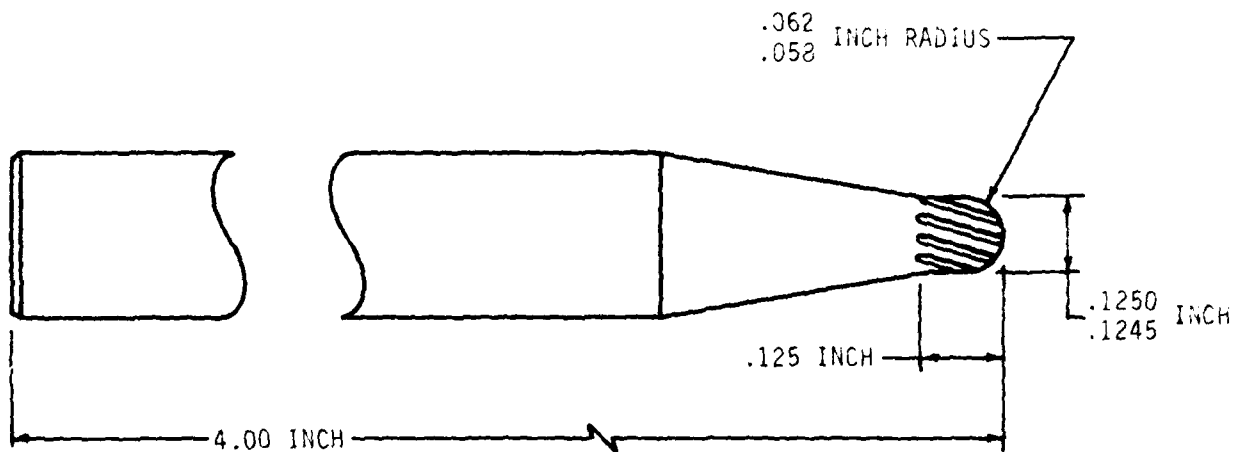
Typical Blisk Platform Finish Milling Cutter Requirements.
